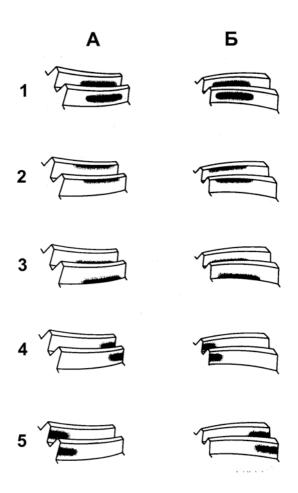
Final drive gears tooth-contact pattern: A – forward speed sides; B – reverse speed sides; 1 - correct tooth-contact pattern; 2 – tooth-contact pattern is located at the tooth tip – to correct, move the drive gear towards the driven gear; 3 – tooth-contact pattern is located at the tooth root – to correct, move the drive gear away from the driven gear; 4 – tooth-contact pattern is located at the narrow tooth end – to correct, move the driven gear away from the driven gear; 5 – tooth-contact pattern is located at the view gear.
